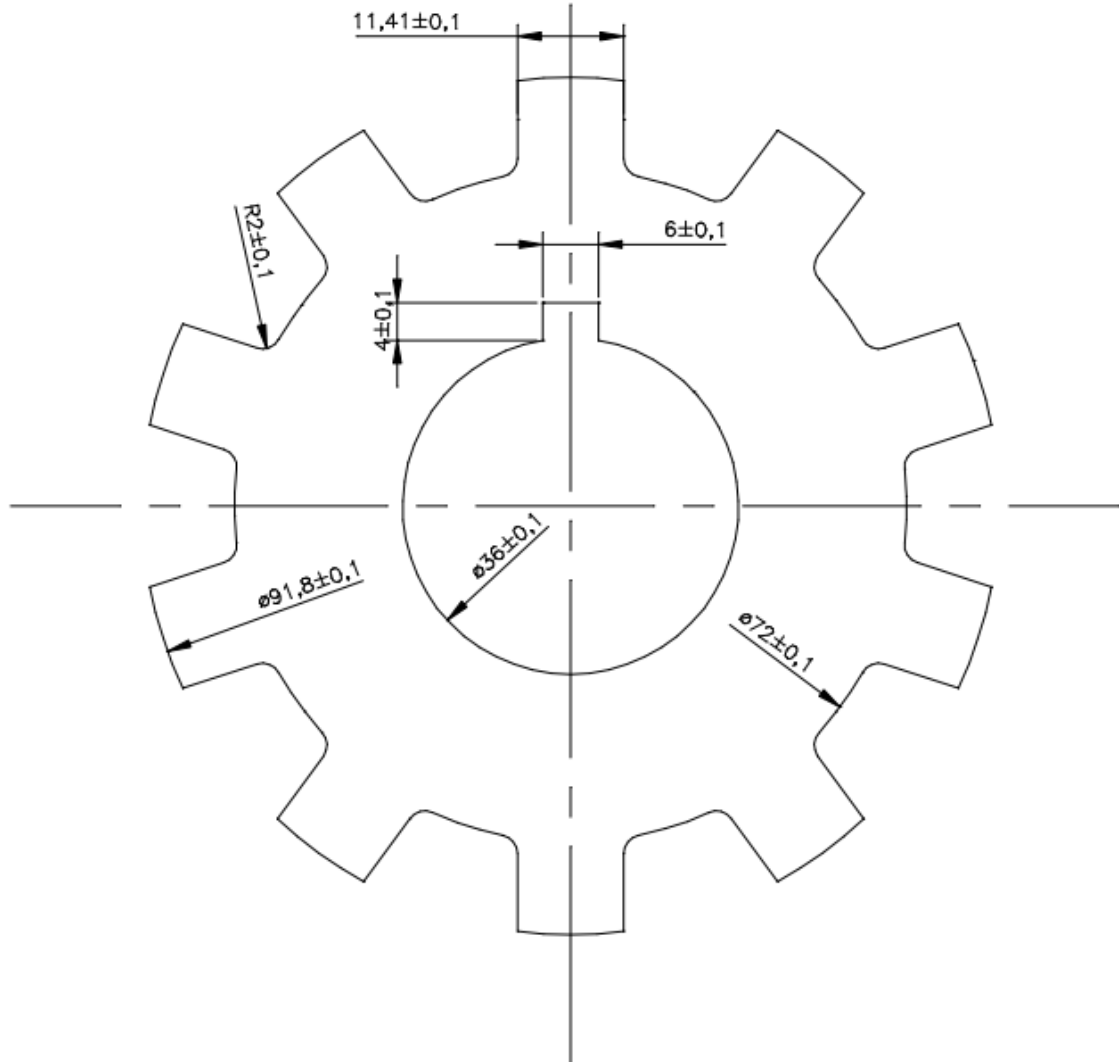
Rotor lamination of the toothed rotor six-phase switched reluctance machine
